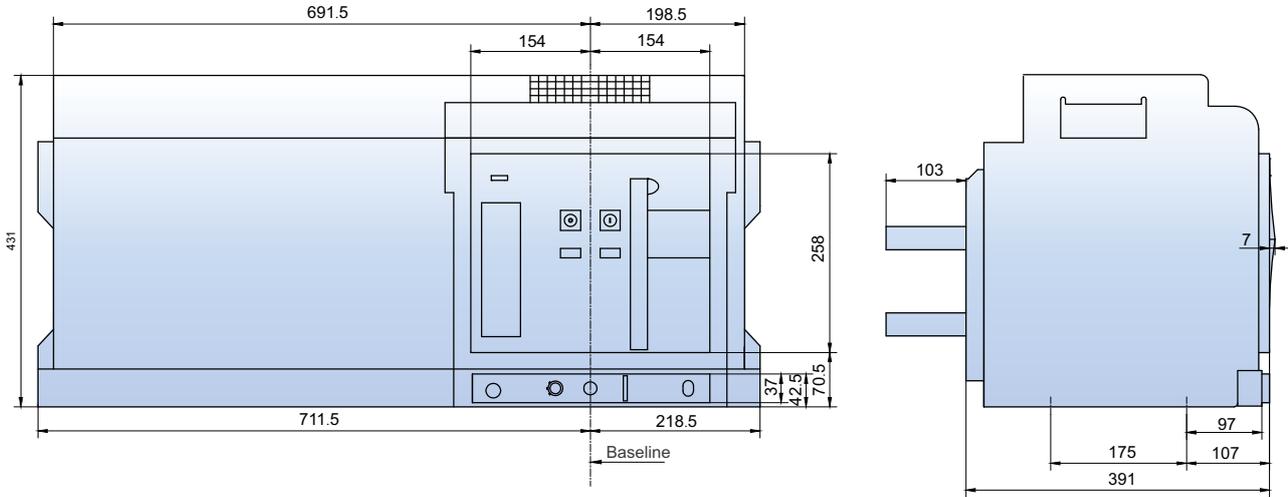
Overall dimension of NA8G-4000(In=6300A) withdrawable type
